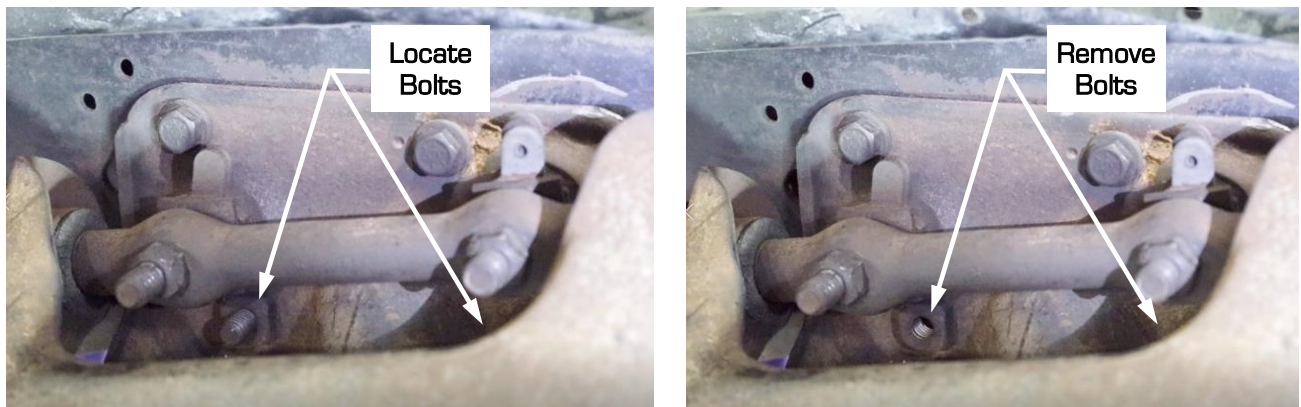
Remove Lower Upper Control Arm Bracket Bolts
